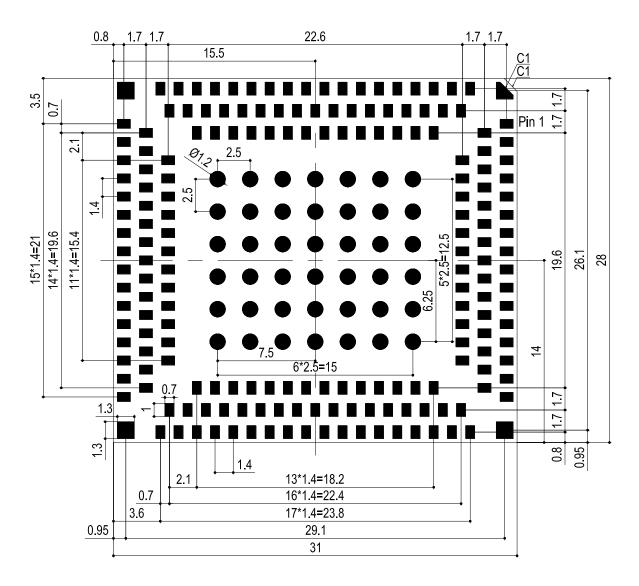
Module Bottom Dimensions (Bottom View, Unit: mm)
